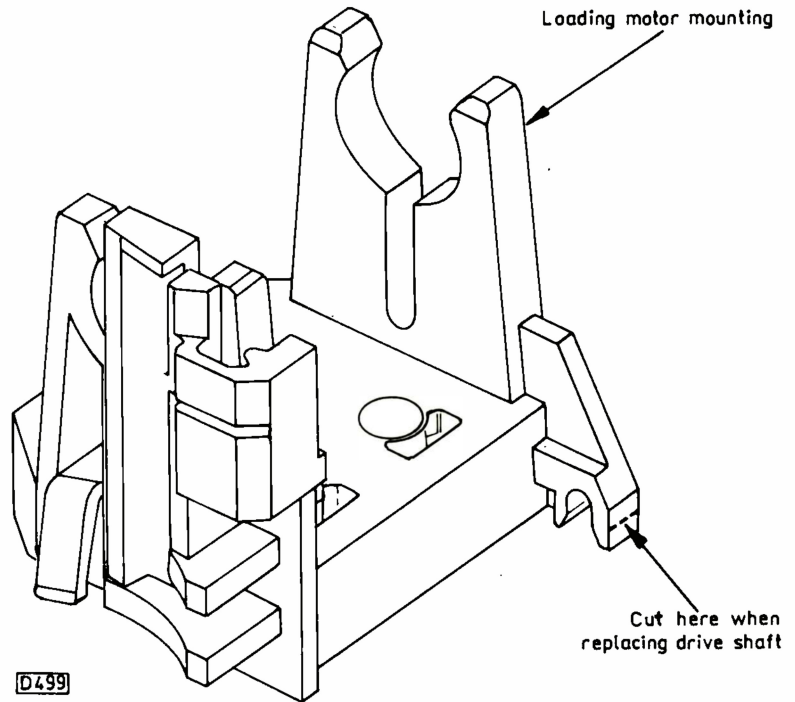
Position of the inverted U-shaped bracket that holds one end of drive shaft 47. The bracket is part of the loading-motor mounting. Cut the bracket as shown above when replacing the drive shaft.
